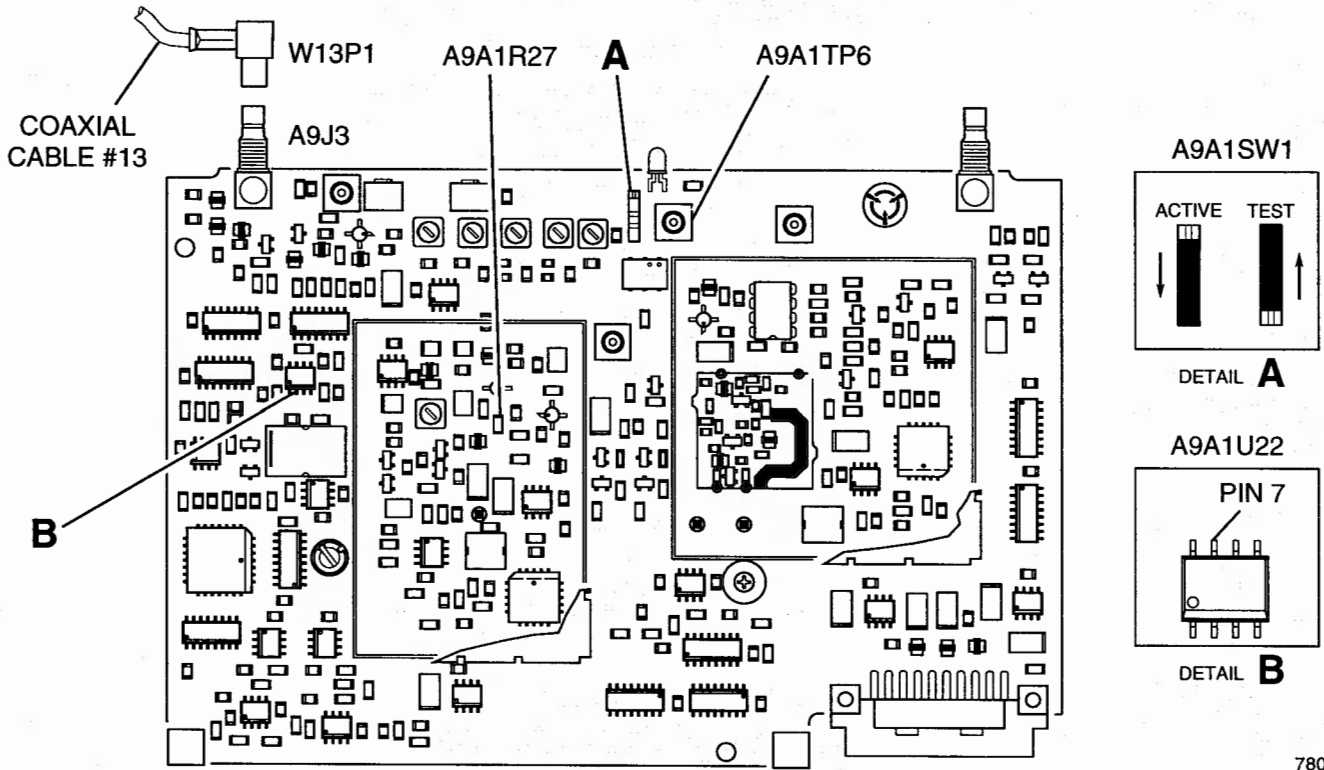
90 MHz Generator PC Board Assembly (78A1A9A1), Revision C
